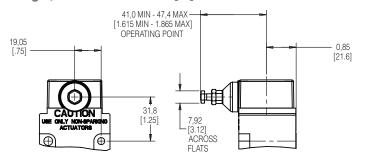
MICRO SWITCH BX2 Series Side Rotary Product Dimensions • mm [in] Side Rotary - Head Codes: A, P, AND R
